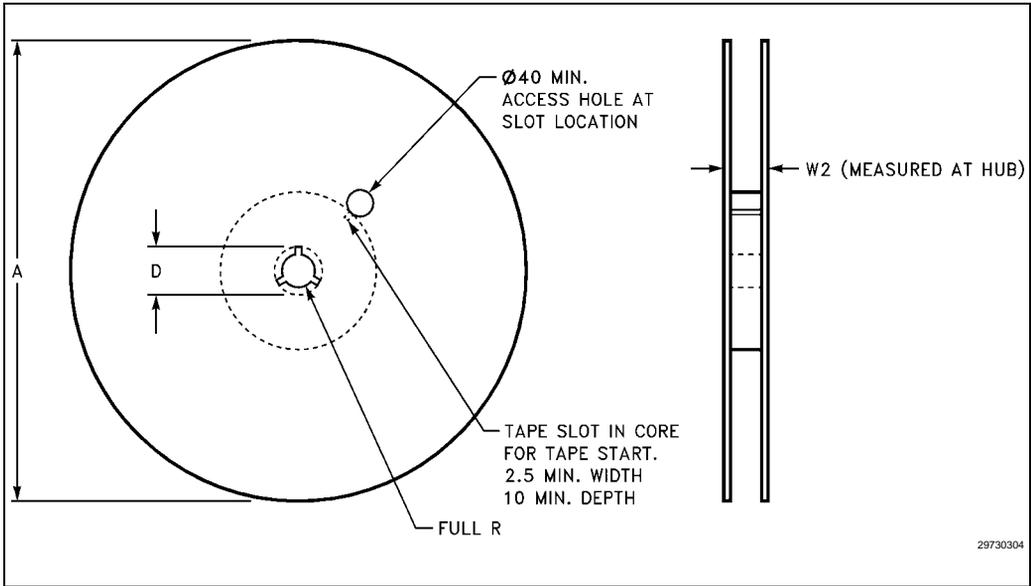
SOP Carrier Tape and Reel Dimensions
